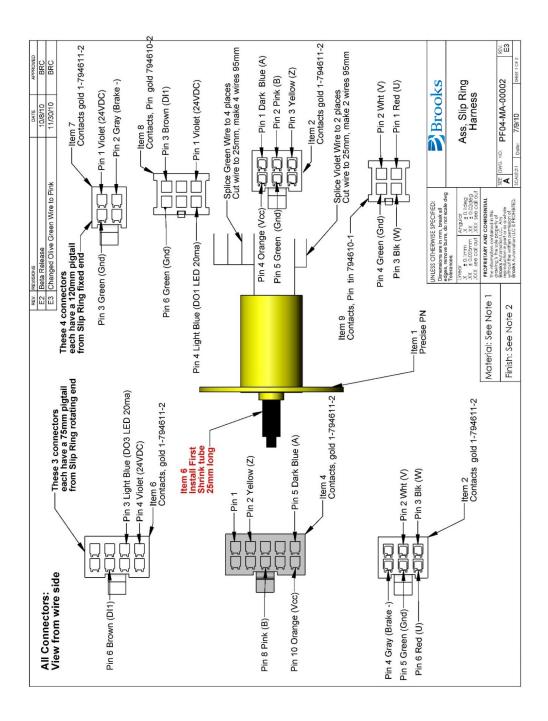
Gripper and Linear Axis Controller Connectors, Assembly, Slip Ring Harness
